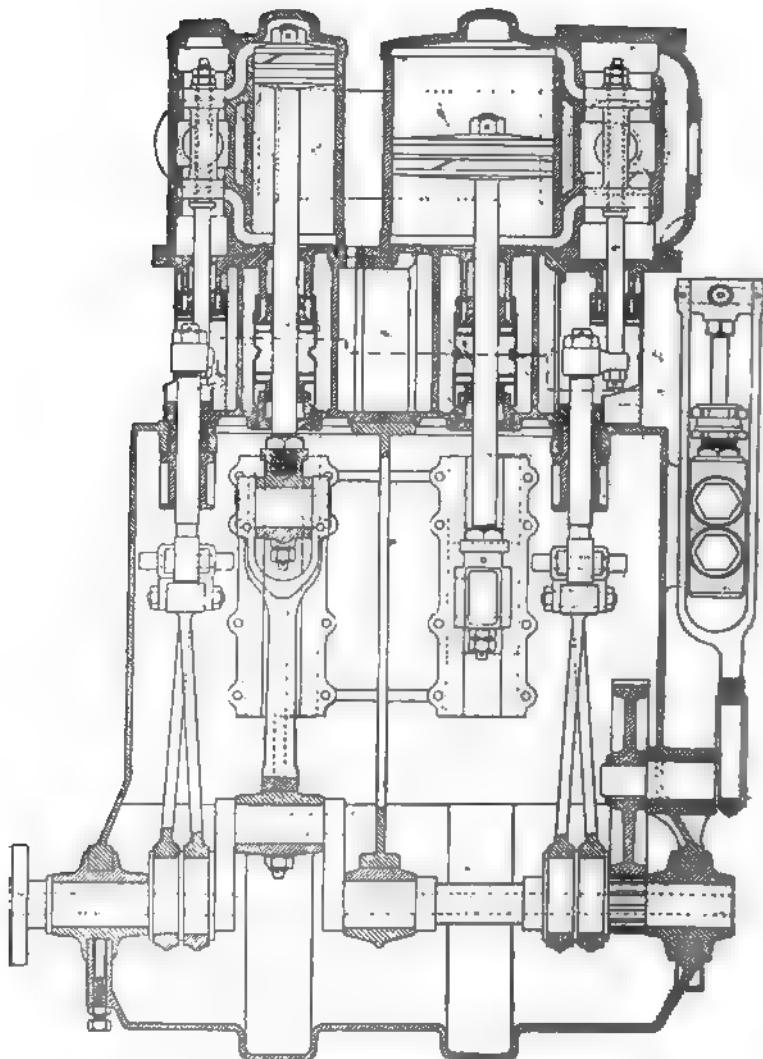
The "Lifu" Compound Steam Engine for heavy vehicle use. This section is drawn through the centre of the cylindrical steam chests, which, as in the Thornycroft engine (Fig. 377), are below and at the sides of the steam cylinders. The appearance of eccentricity in the attachment of the piston rods may thus be understood.
